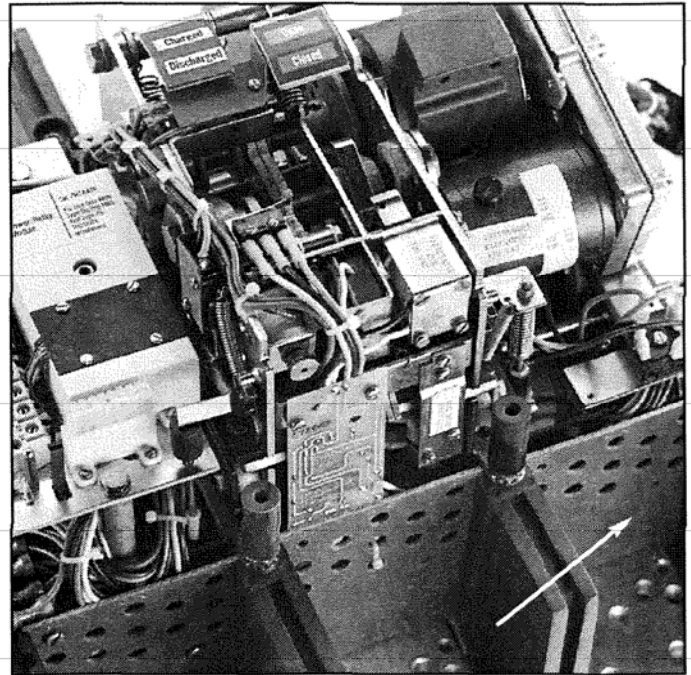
Auxiliary Switch Installed Behind Right End Barrier
